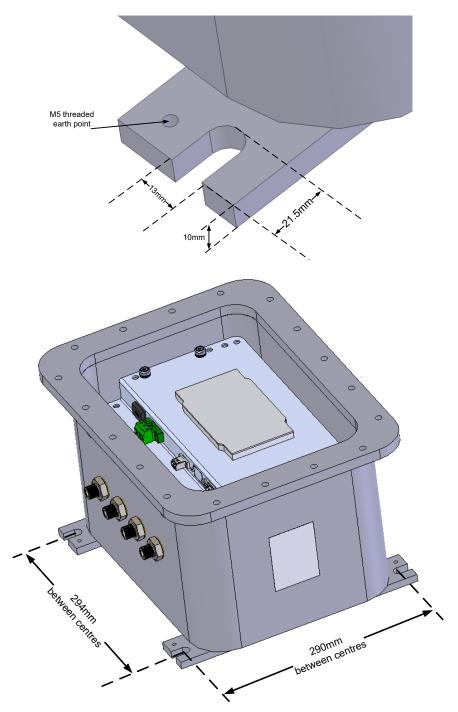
iWAP107/iRFID107 Stainless Steel Enclosure Mounting Points
